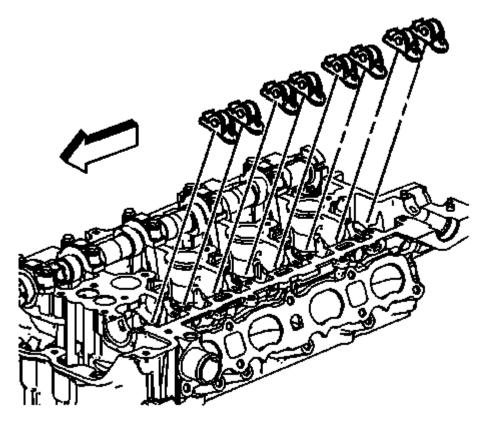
Valve Tips Courtesy of GENERAL MOTORS COMPANY
